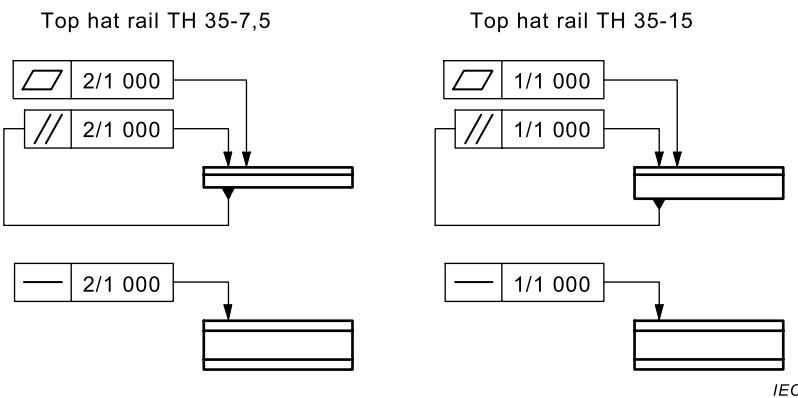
Tolerances (TH 35-7,5 and TH 35-15)
